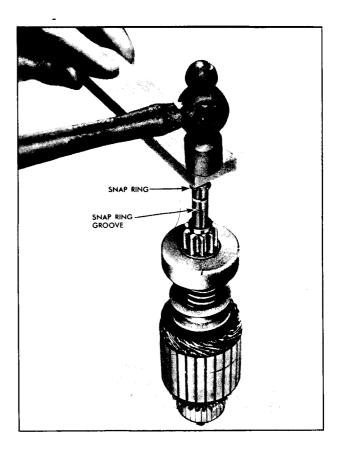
E-13 Forcing Snap Ring onto Armature Shaft thrust washer on armature shaft and slide commutator end frame onto shaft.
